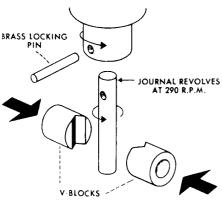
Exploded View of Vee Blocks and Journal Arrangement, Falex Pin and Vee Block Test Machine
